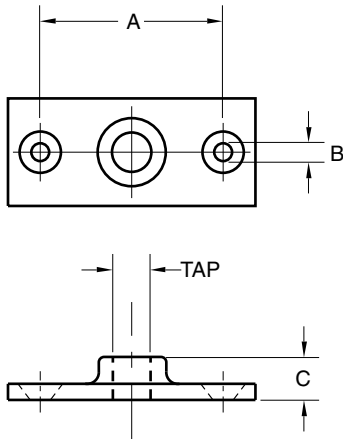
E AND FIGURE 85B – SINGLE PLATE
